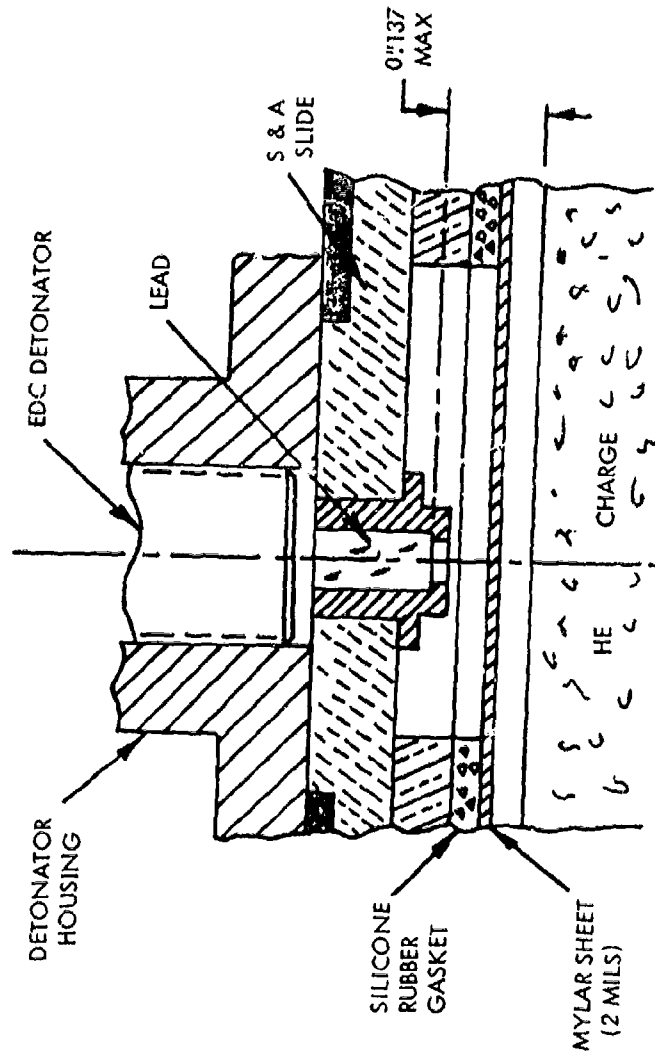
BASEPLATE REDESIGN FOR LSPE EXPLOSIVE PACKAGE
